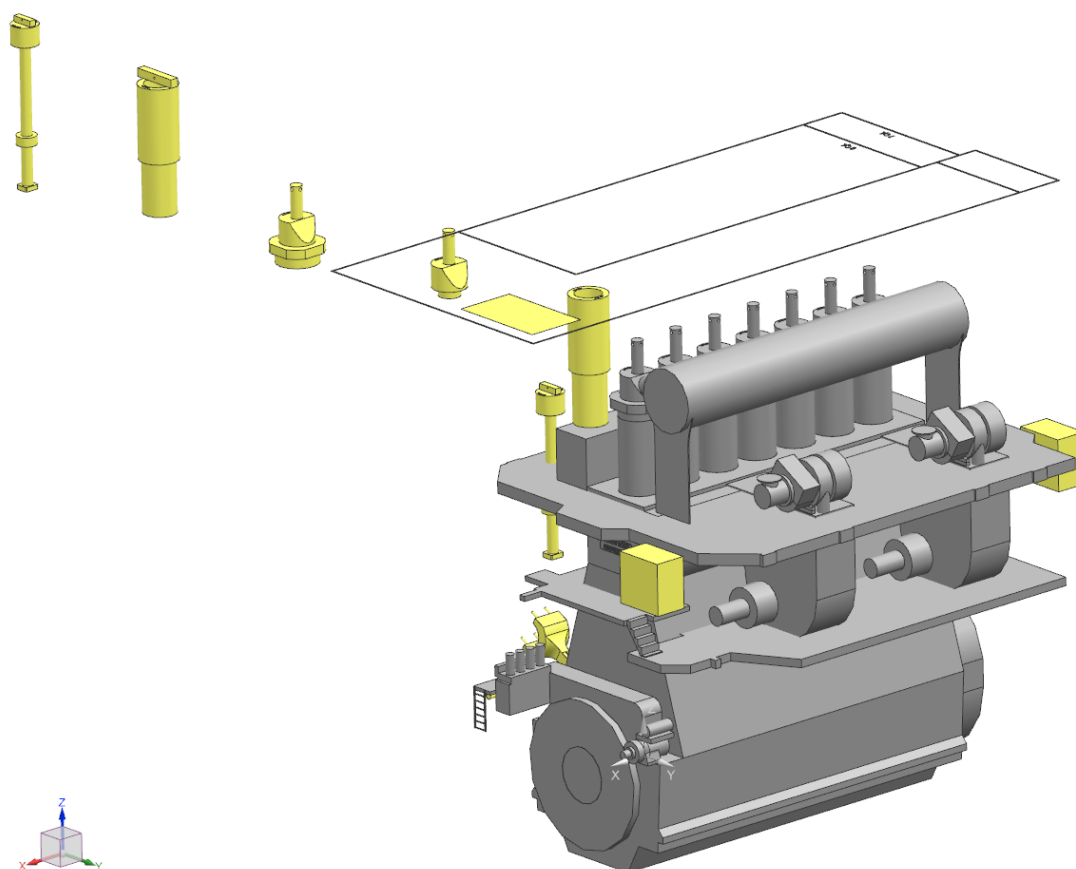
The 3D CAD model of the Dismantling Dimensions (DG 0816-02) for X82-2.0 engines, showing dismantling components in yellow and the crane area inside the rectangular frame
